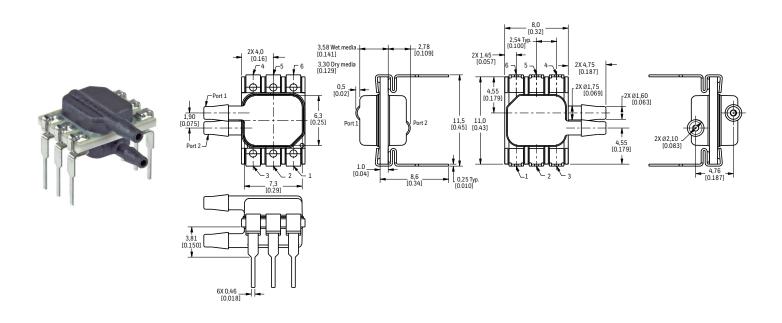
DIP PACKAGE DIMENSIONAL DRAWINGS (CONTINUED)
